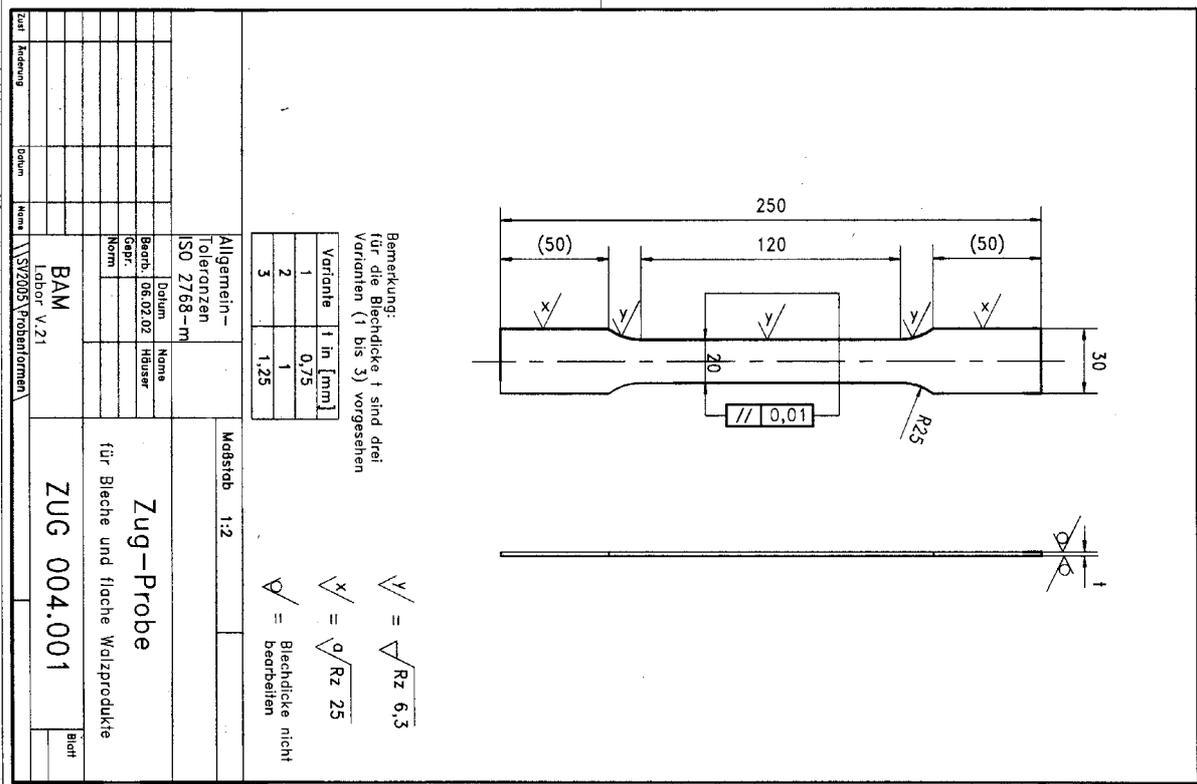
Test piece geometry ISO20x80 for flat samples of the materials AA5754, ZStE180, DX56
